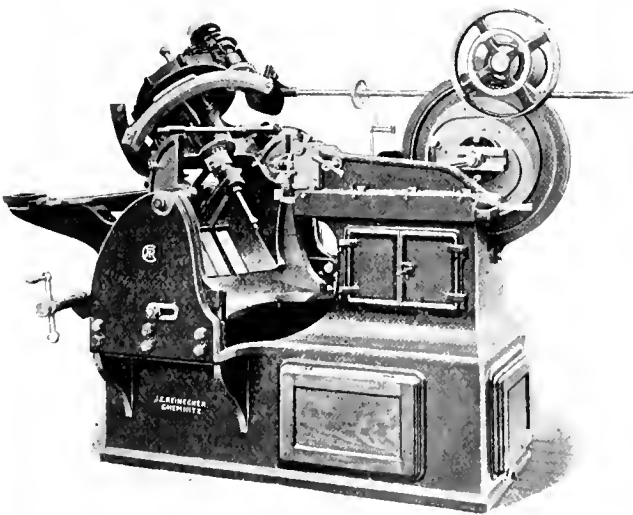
Bilgram Bevel Gear Shaper as built by J. E. Reinecker.
